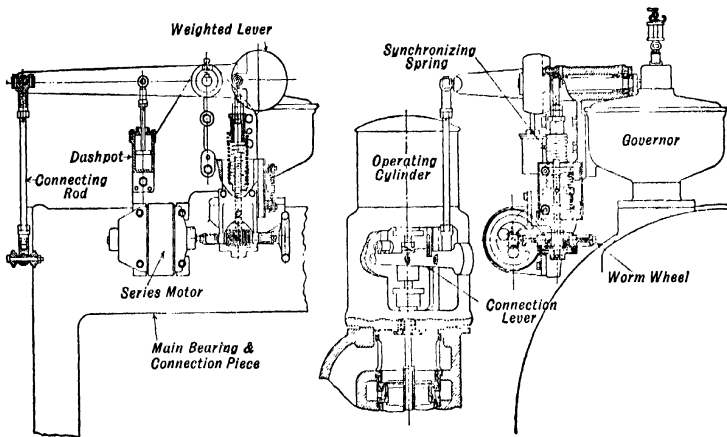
Assembly of Governor and Valve Gear Curtis Turbine.
